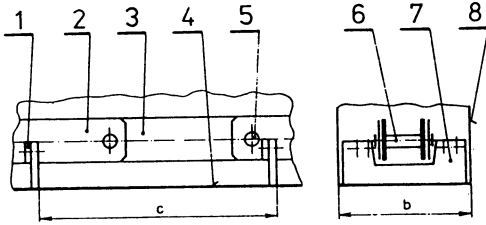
1 - catch, 2 - outer clip of the chain, 3 - inner clip of a chain, 4 - bottom sliding plate, 5 - pin, 6 - container, 7 - carrier plate, 8 - side plate.
